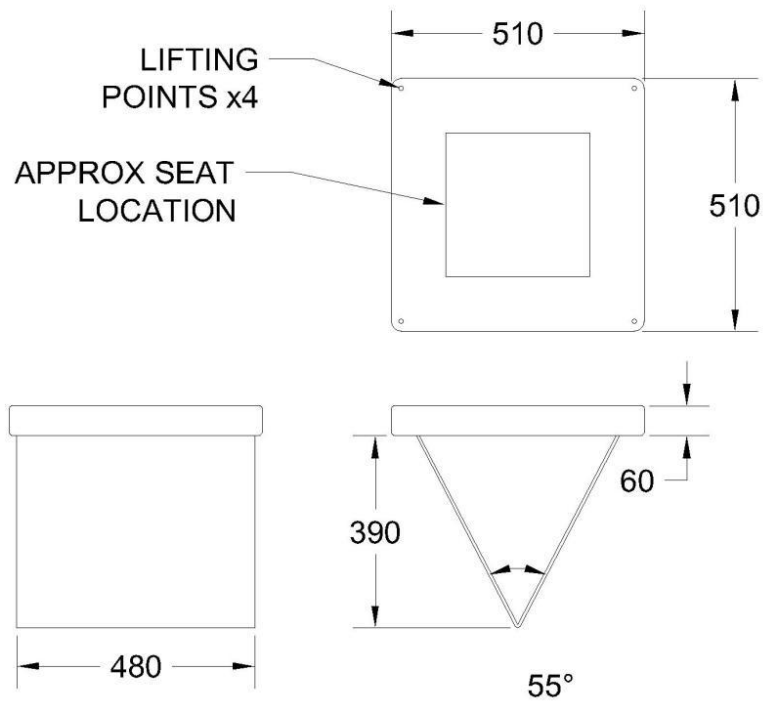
Dimensions of Test Platform and Wedge (all dimensions in mm)^{C2}
